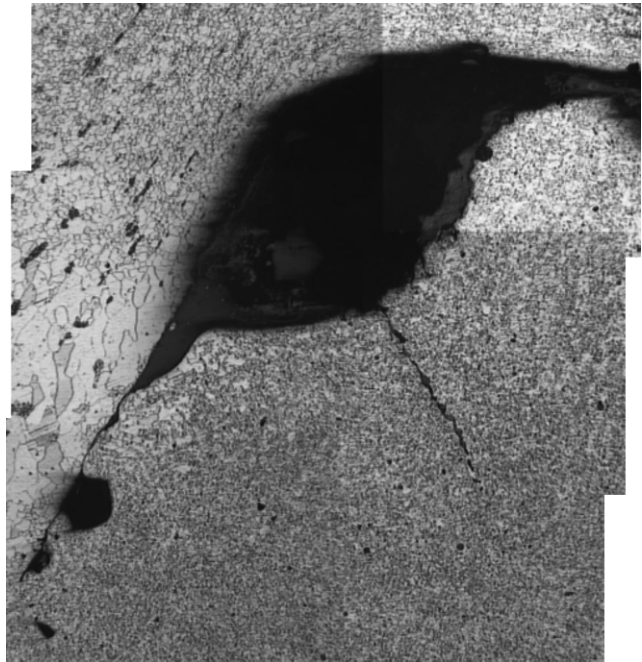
Lack of penetration in the weld root (upper right) associated with the thickness, lateral lack of fusion (lower left) and inclusions ($\times 100$, sample 7-6).
